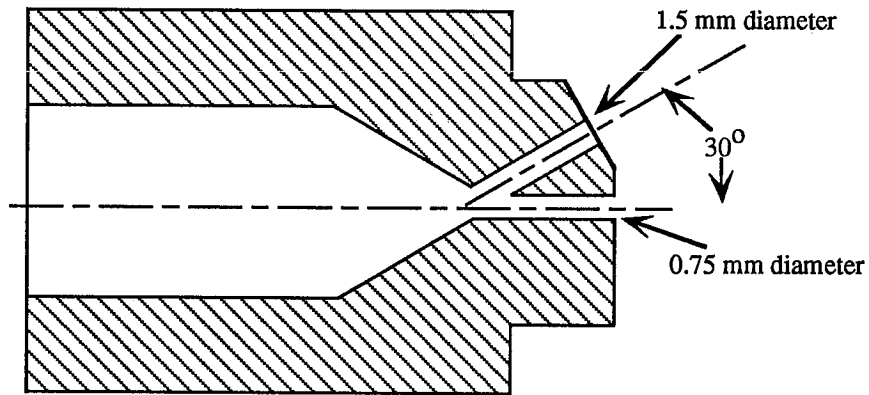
Modified Waterjet Drill design showing secondary nozzle (Ref. 2).
